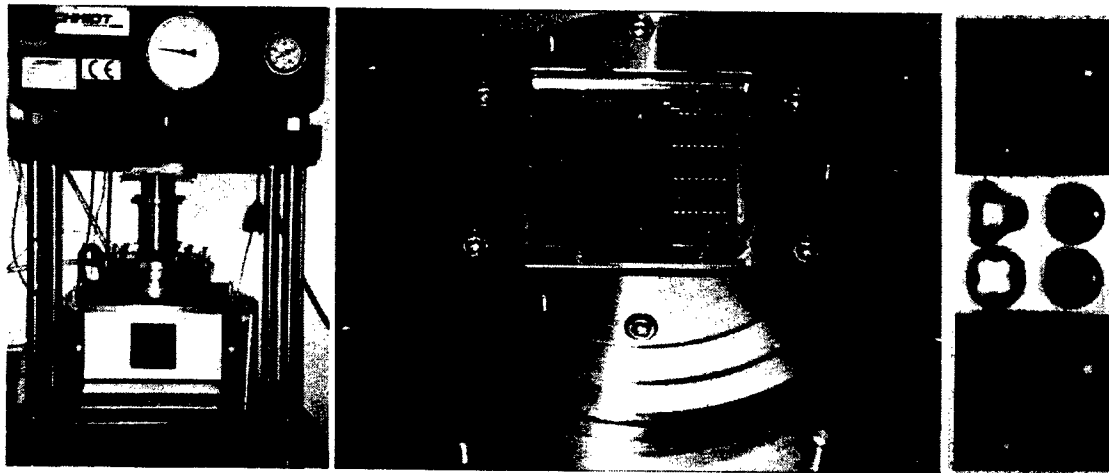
Photomolding machinery, top view on upper molding tool carrying two metallic mold inserts and surface image of a metallic mold insert carrying annular gear wheel system.
